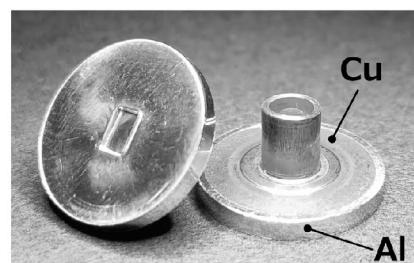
Appearance of the cold forge-welded terminal
